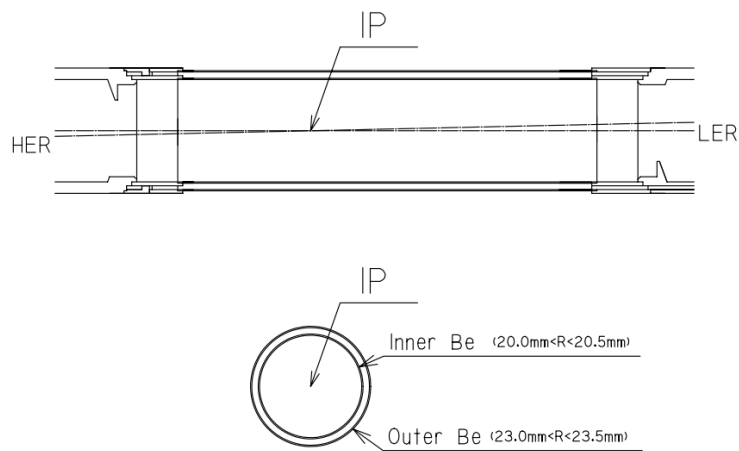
The cross-section of the beryllium beam pipe at interaction point [5].
